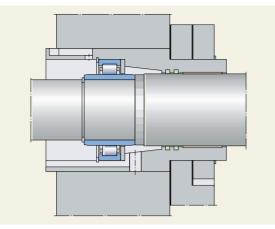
Oscillating inking roller Oscillating roller of inking system fitted with a cylindrical roller bearing with extended inner ring
